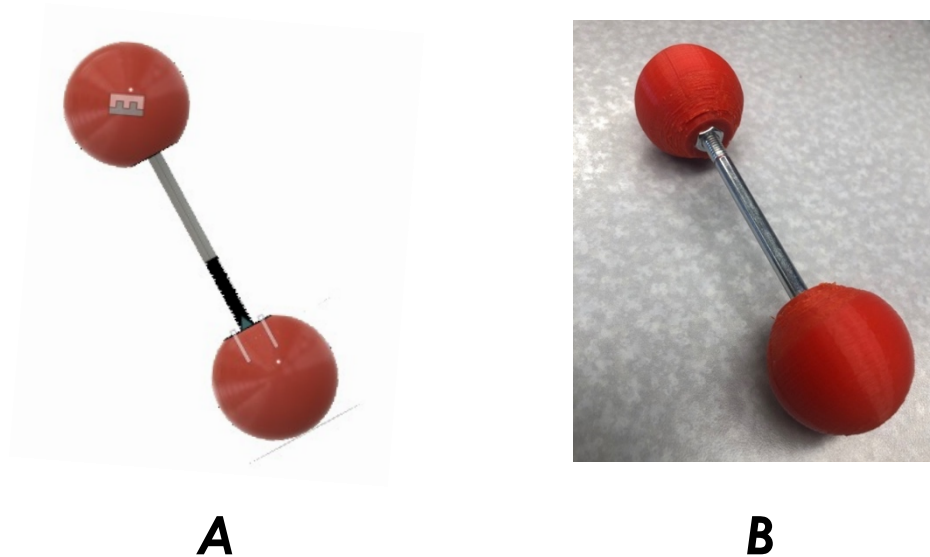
A) The screw and nut mechanism visualized in Fusion 360. B) The assembled physical screw and nut mechanism.
